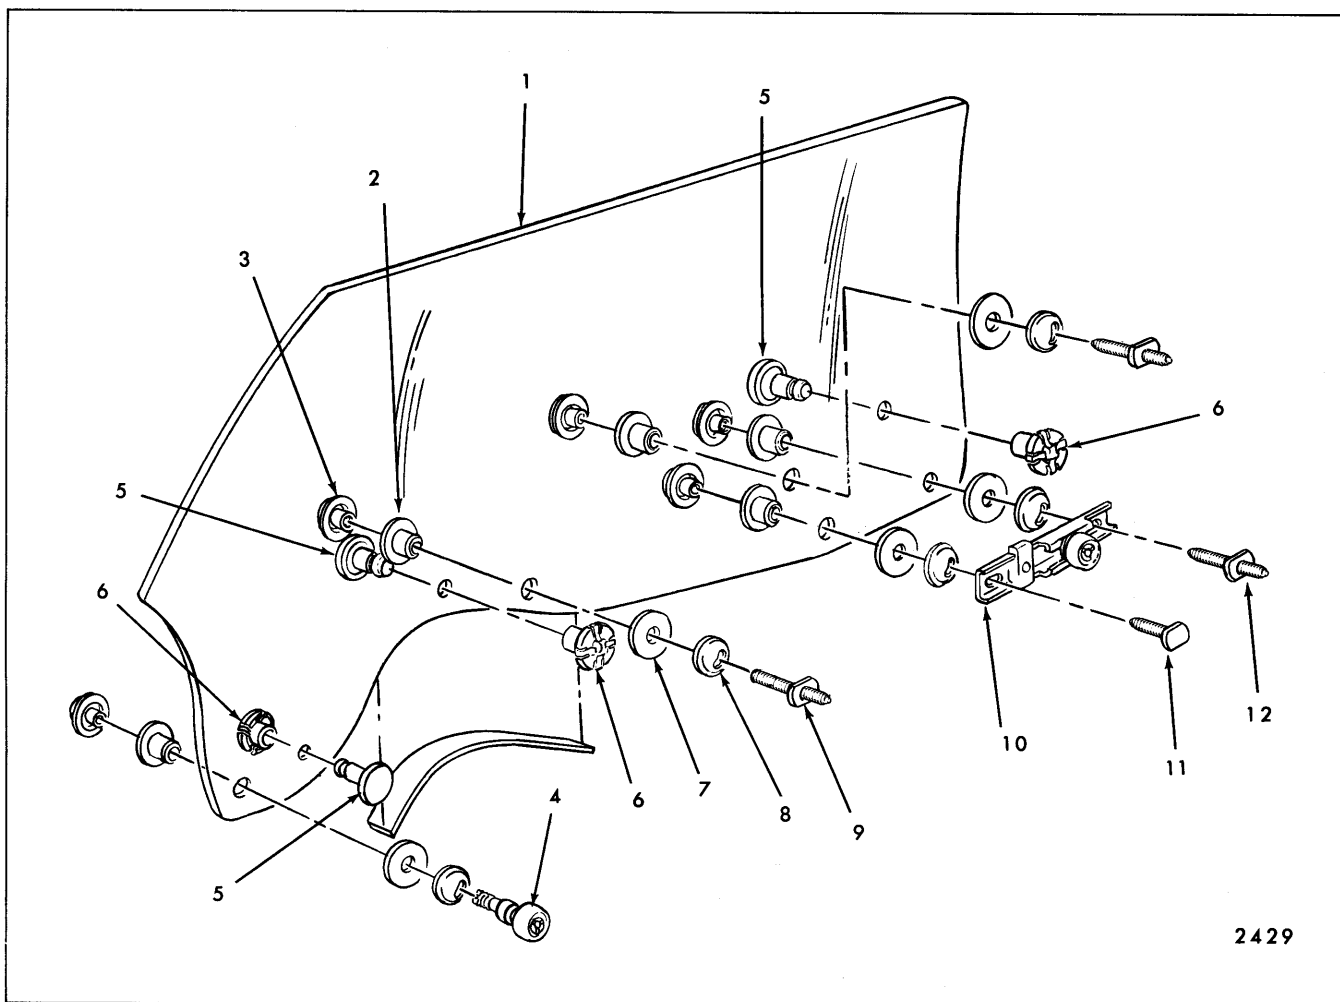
Front Door Window Assembly - 16647 and 26657 Styles
